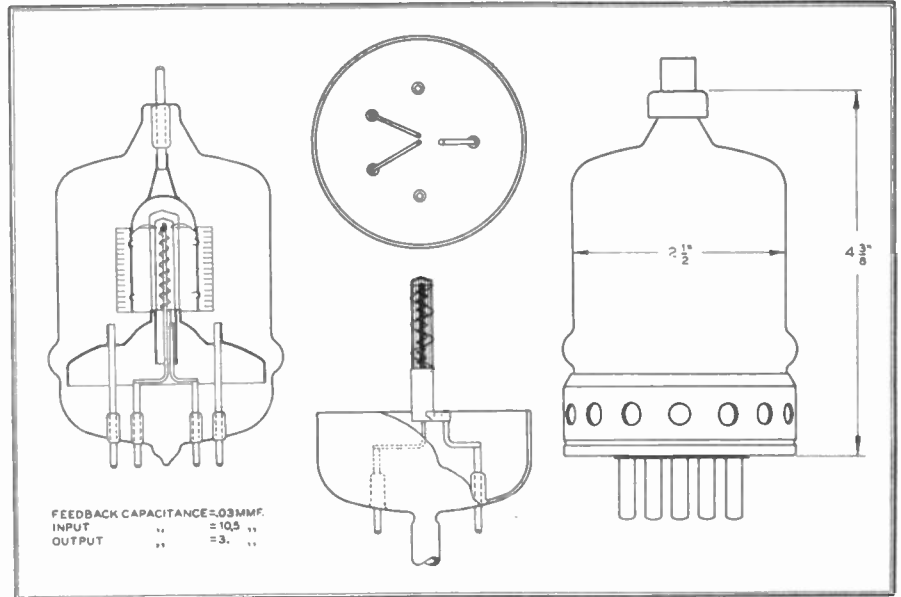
MECHANICAL DESIGN DETAILS OF THE TYPE 4-125A POWER TUBE
